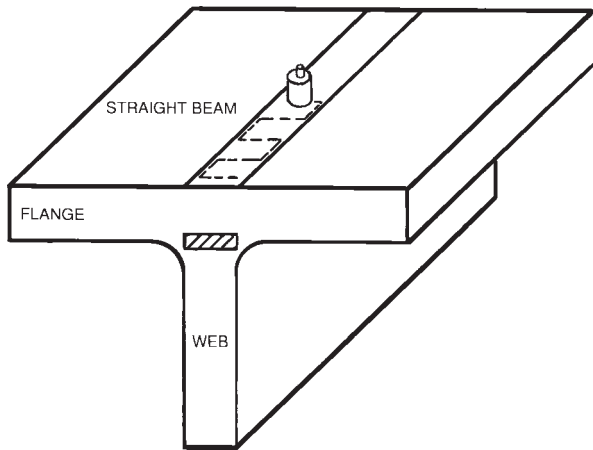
Technique 6, for Inspecting the Fusion Zone of T-Welds
